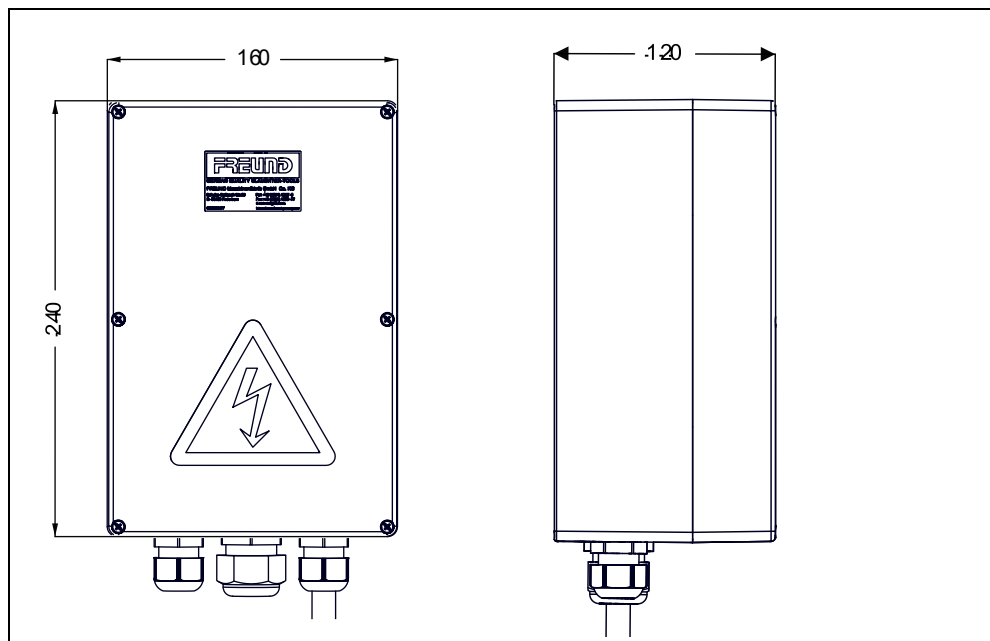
Dimensions of the control box SG WBS51-08nc (specifications in mm)
